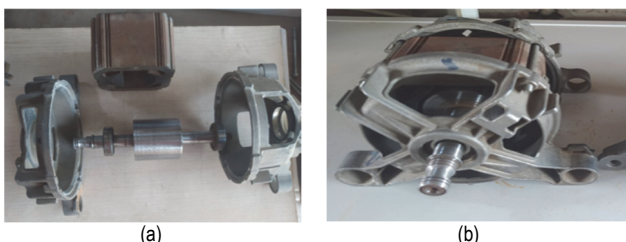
Parts of the second flywheel (a) Second flywheel, bearings, covers, and safety cover (b) Second flywheel mounted in the safety cover
